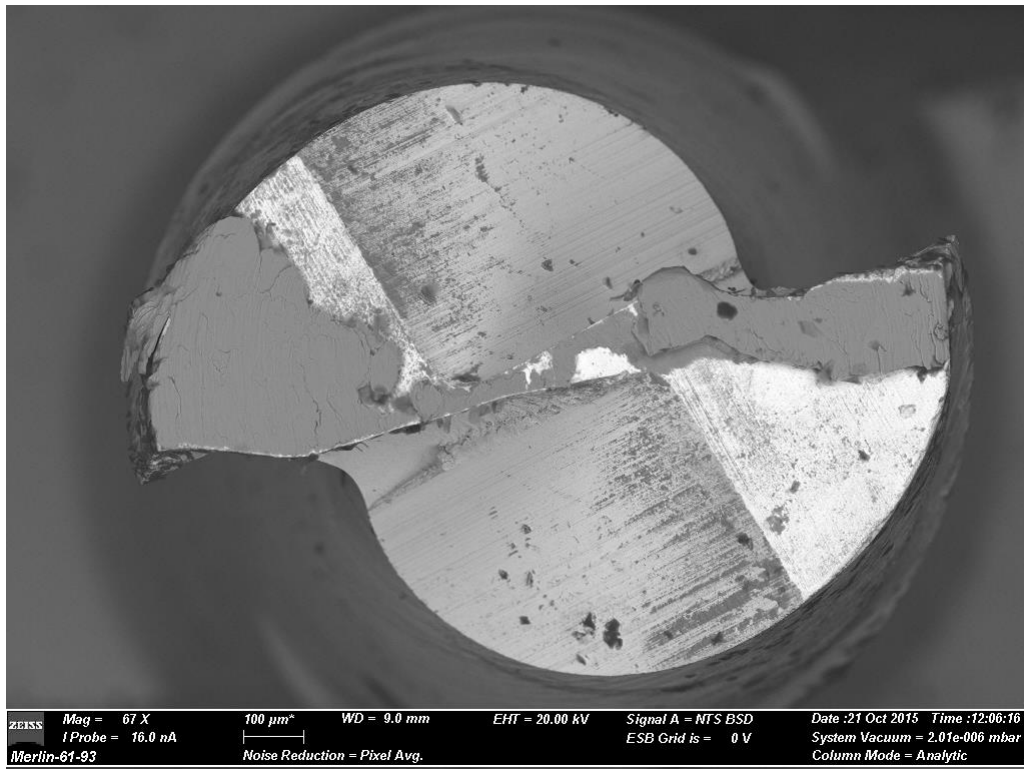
Experimental run 8: Tungsten carbide tool after machining with parameters $v_c = 70.69$ [m/min], $v_f = 612.97$ [mm/min] and $a_p = 106.42$ [μm]
